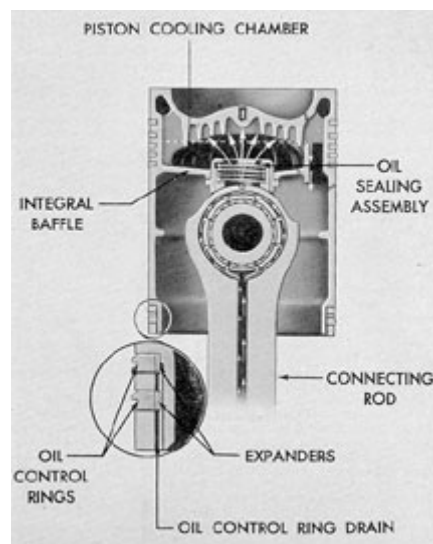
Piston and piston pin lubrication and cooling, GM.
